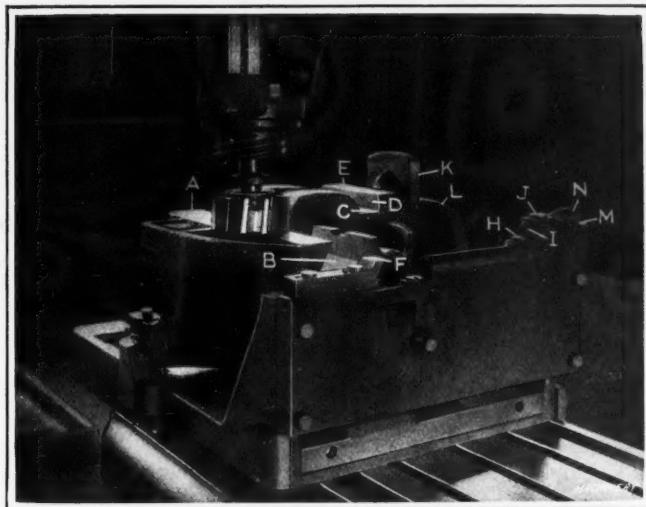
Work set up on Milling Machine for roughing out Saddle Bearing
